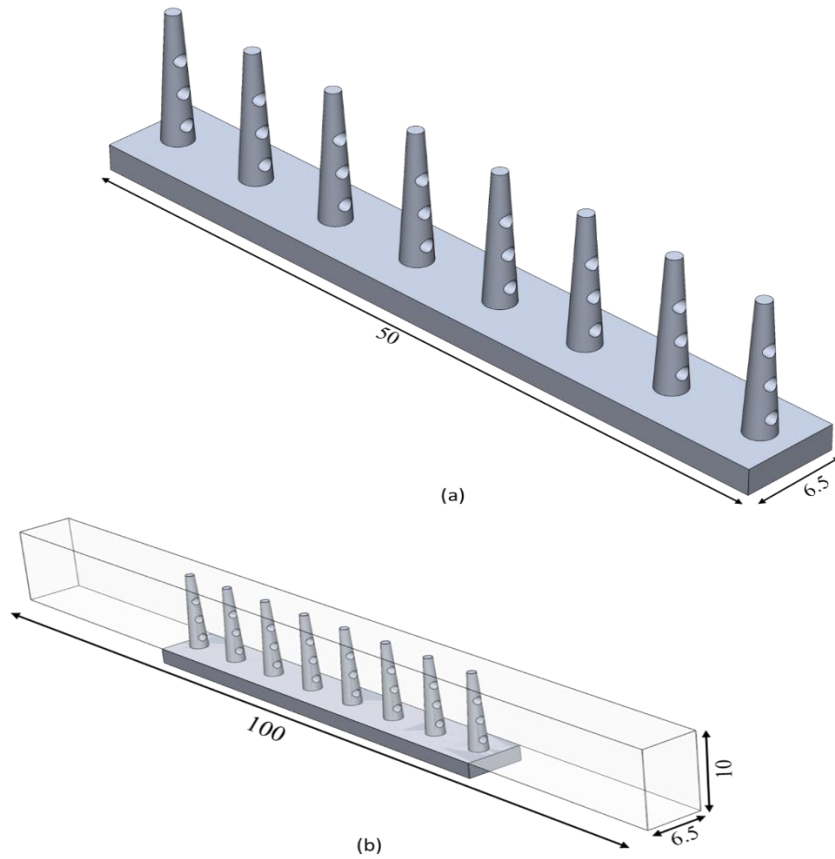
(a) Dimensions of the heat sink slice in mm; (b) Dimensions of the test channel in mm.
